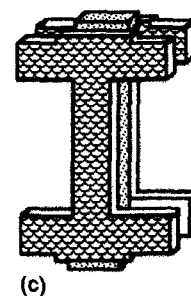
Anti-buckling jig for thin compressive specimens.
